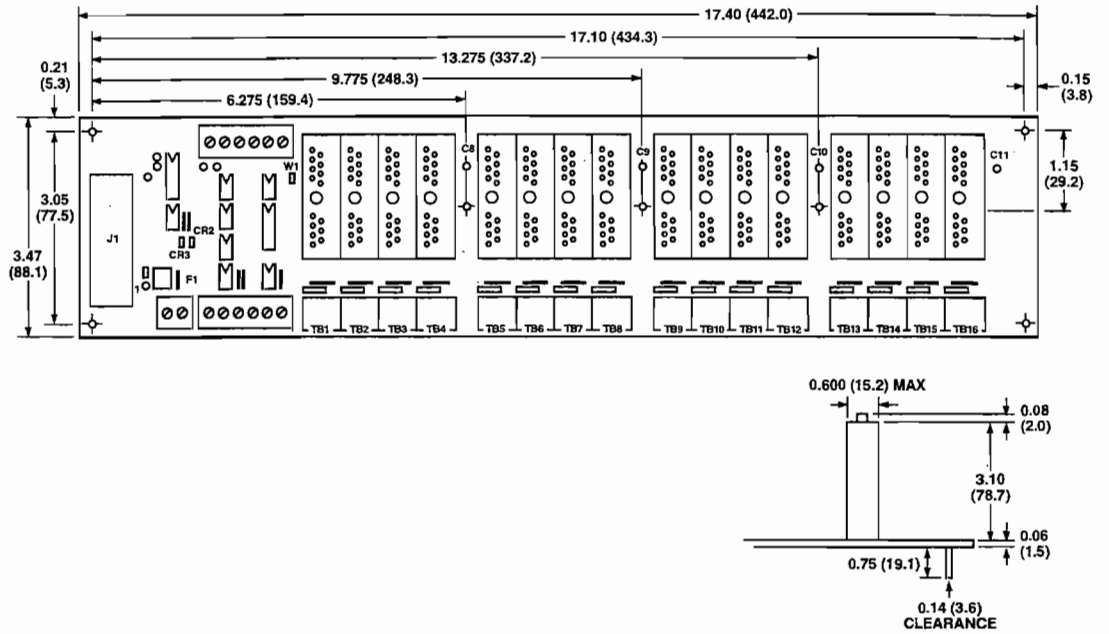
6BP16-1 and 6BP16-2 Backplane Layout
